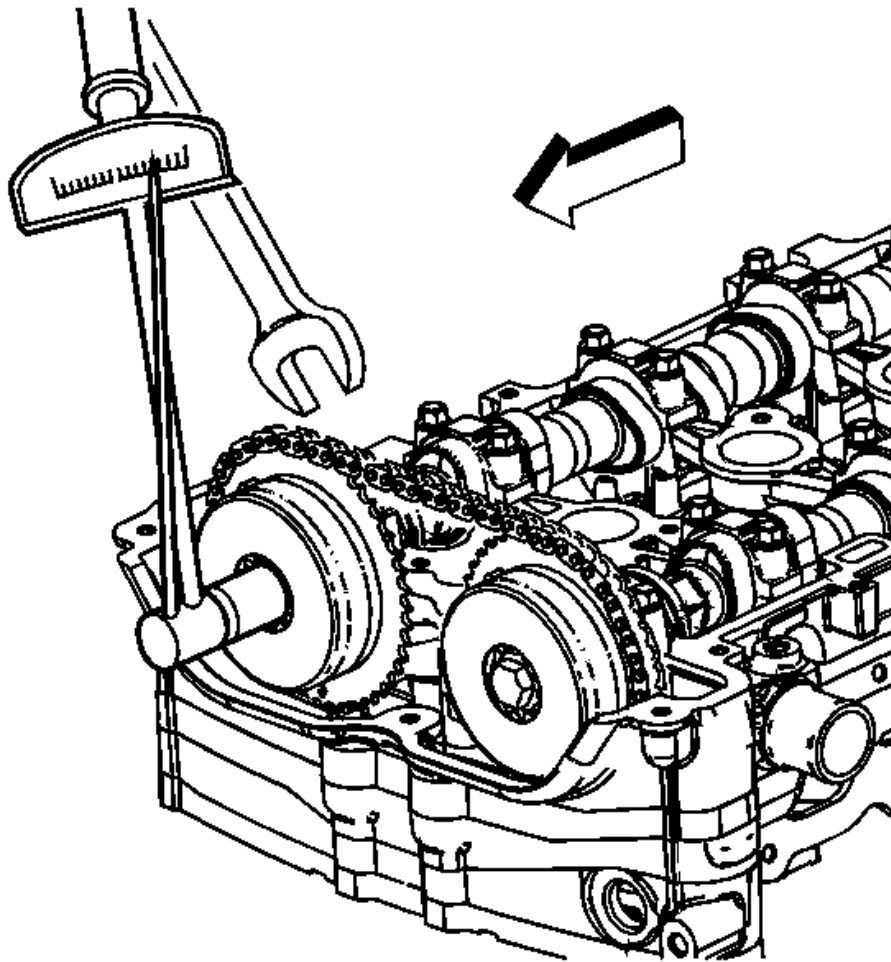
View Of Tightening Camshaft Actuator Bolt
